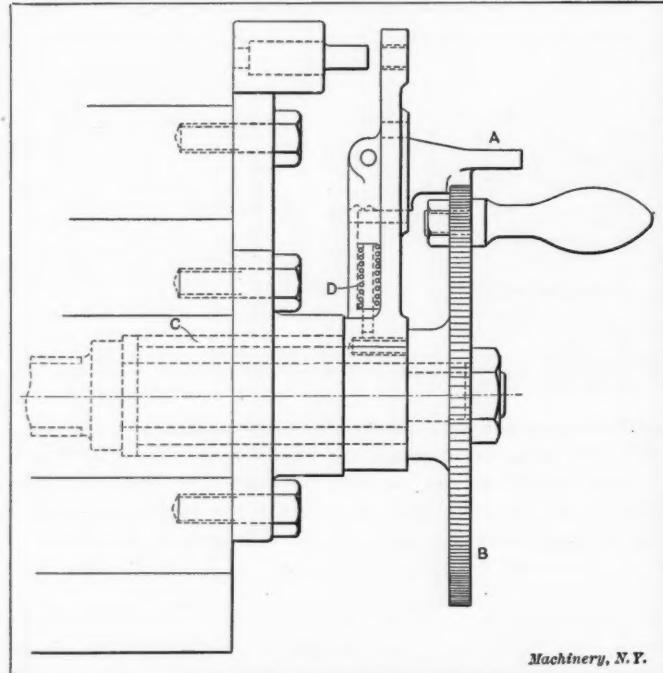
Locking Arrangement for Quick Withdrawal Device on Threading Lathe
